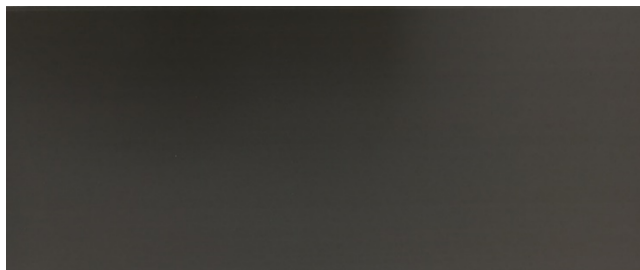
Single-layer slide die electrode coating using lower viscosity Pt/Vu ink showing good quality.
